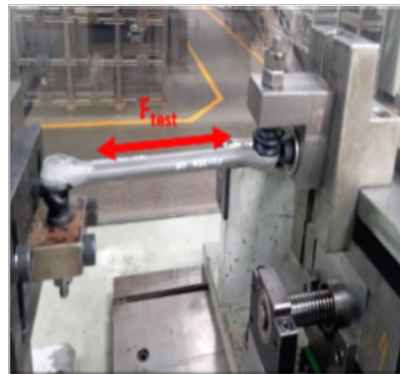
Tensile and compression test results of stabilizer link parts manufactured with SLM
